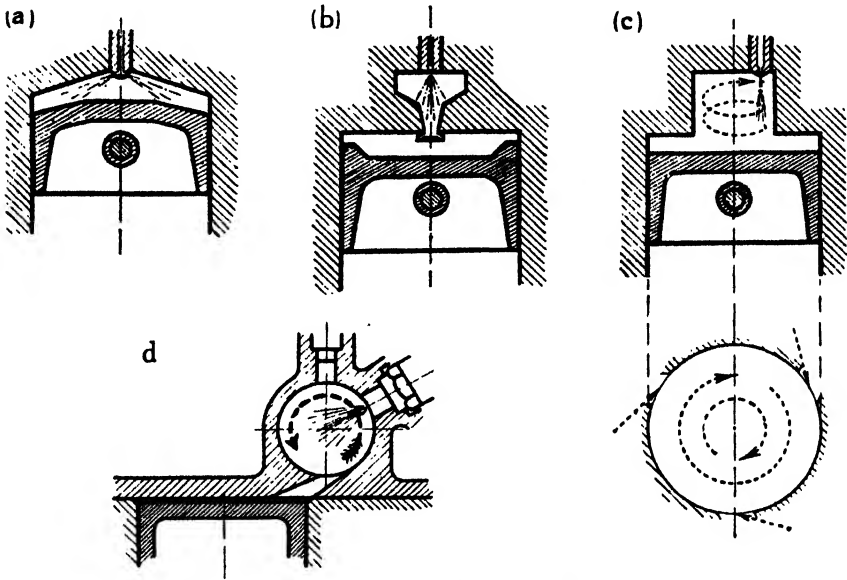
Forms of combustion chamber, compression-ignition engine.
